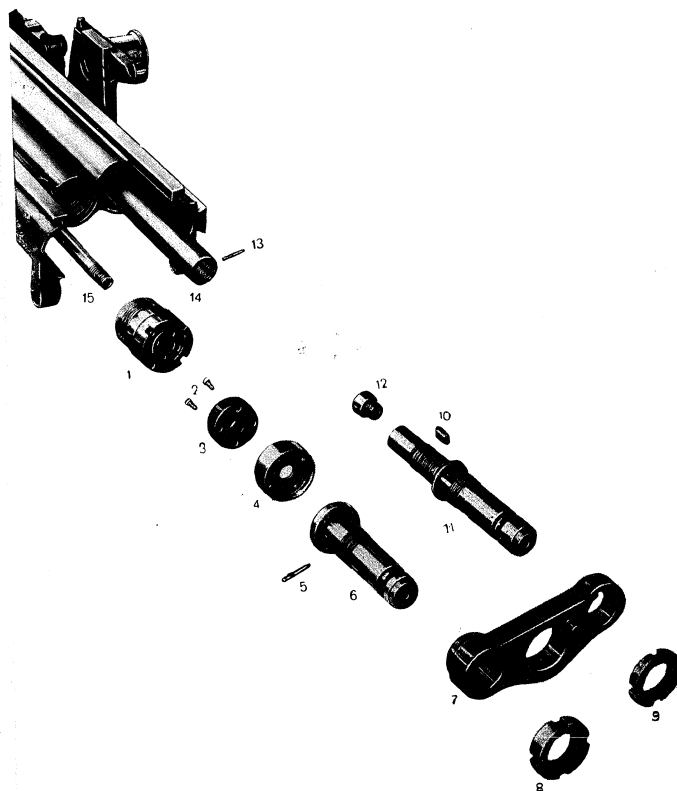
RECUPERATOR PISTON ROD EXTENSION AND RECOIL BRAKE CONNECTOR — DISMANTLED
